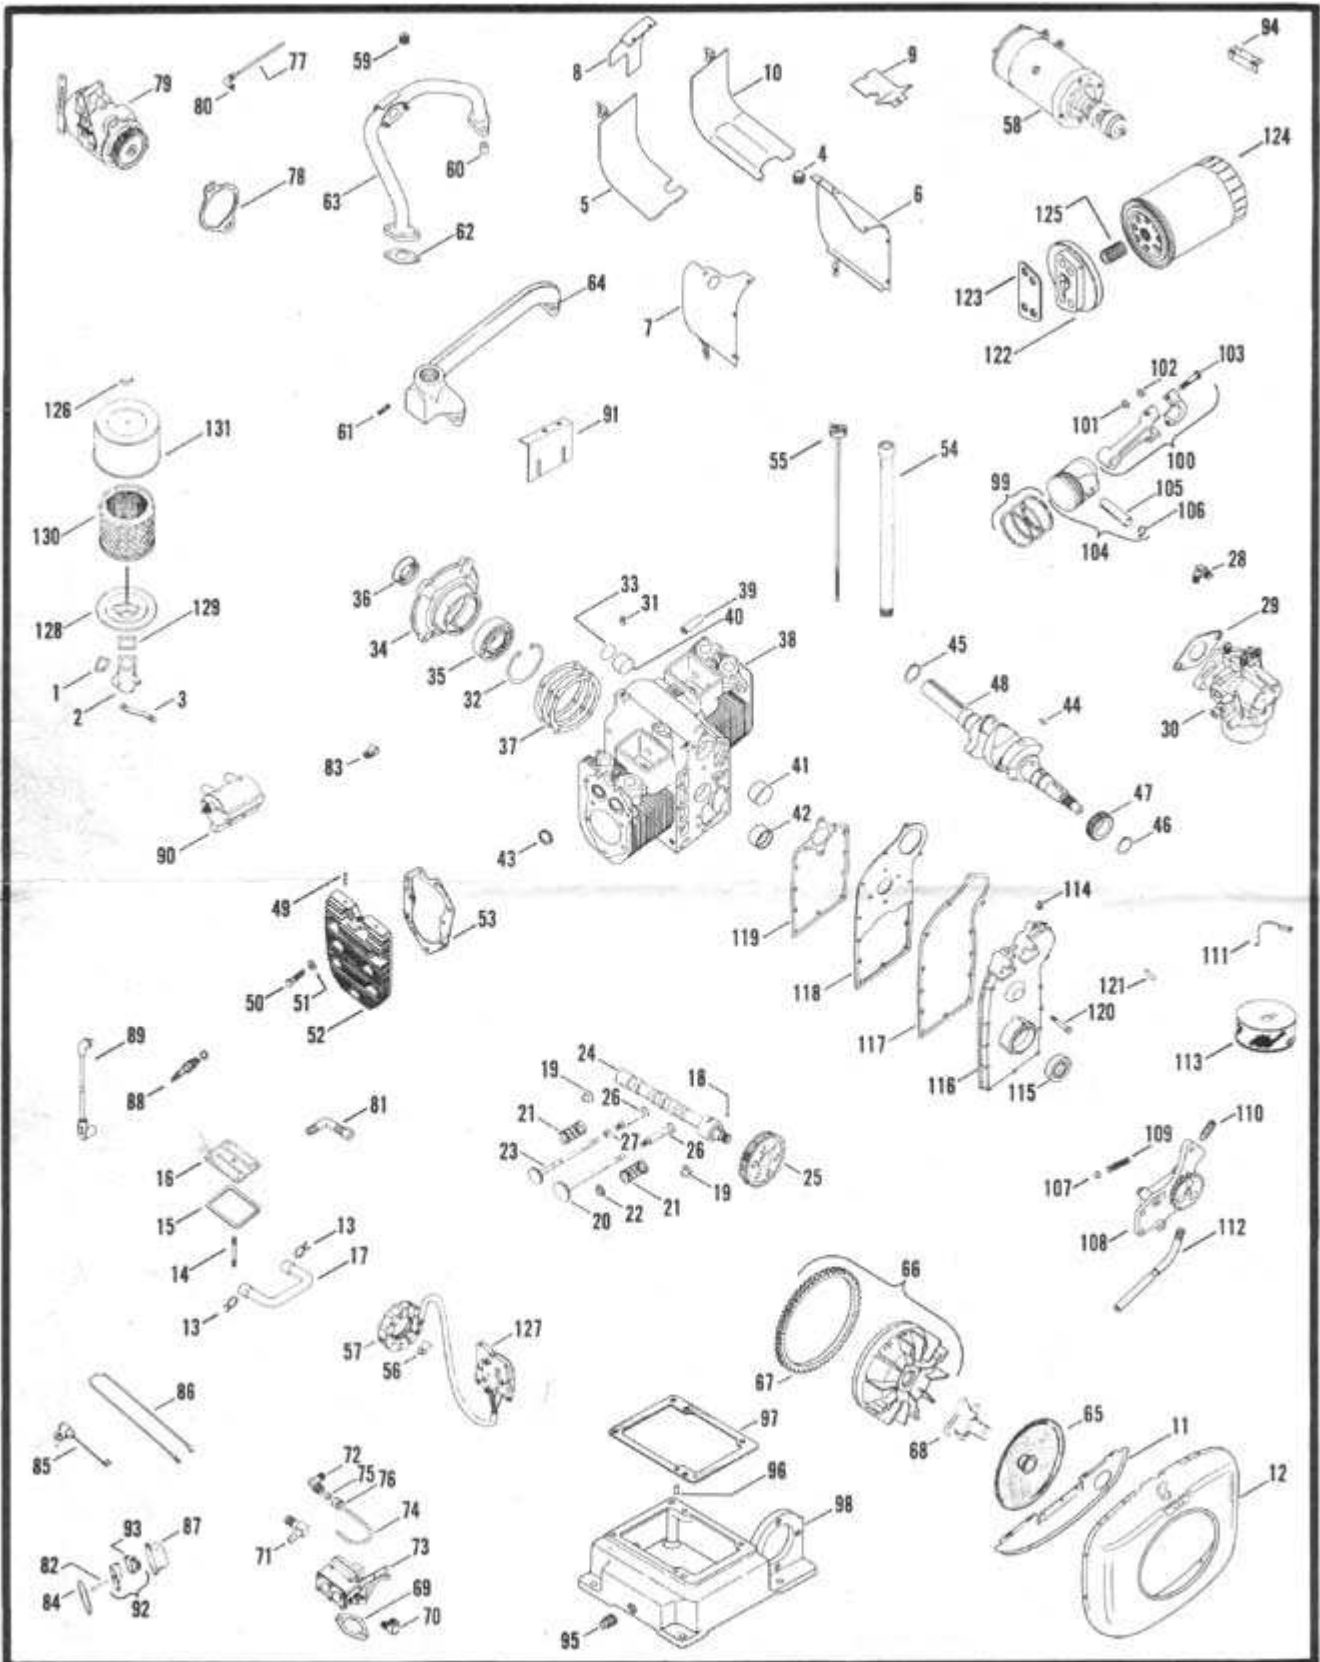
PARTS IDENTIFICATION - EXPLODED VIEW K482 ENGINE
